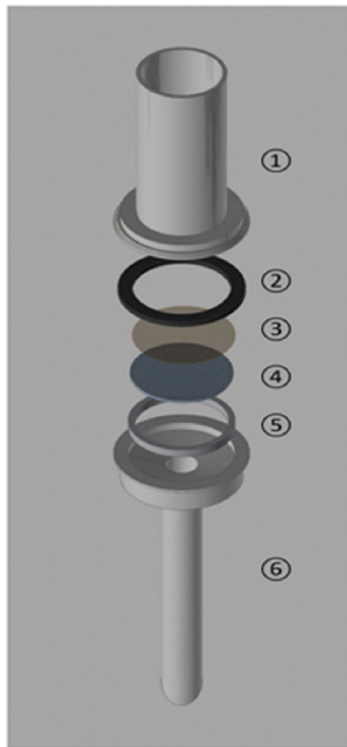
Construction drawing of the filtration attachment (CAD image file): ① The upper part is composed of a stainless steel hollow cylinder (DN25) and a clamp weld-on socket ② The sealing ring provides the necessary contact pressure of the membrane filter ③ The membrane filter is inserted between the sealing ring and filter frit ④ The filter frit serves as a carrier surface for the membrane filter and defines the flow volume ⑤ The carrier ring serves as a support and fixation of the filter frit ⑥ The lower part is composed of a bevelled stainless steel hollow cylinder (DN10) and a clamp welding socket
